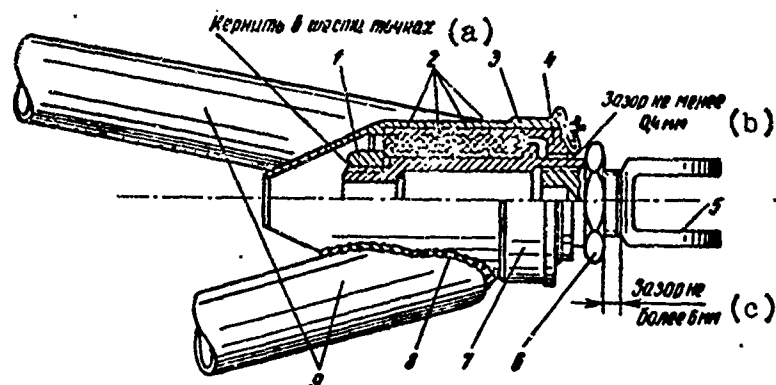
Shock absorber; 1 - rod nut; 2 - shock absorber ring; 3 - rod; 4 - special nut; 5 - forked bolt; 6 - lock nut; 7 - sleeve of mount; 8 - weld; 9 - struts.
